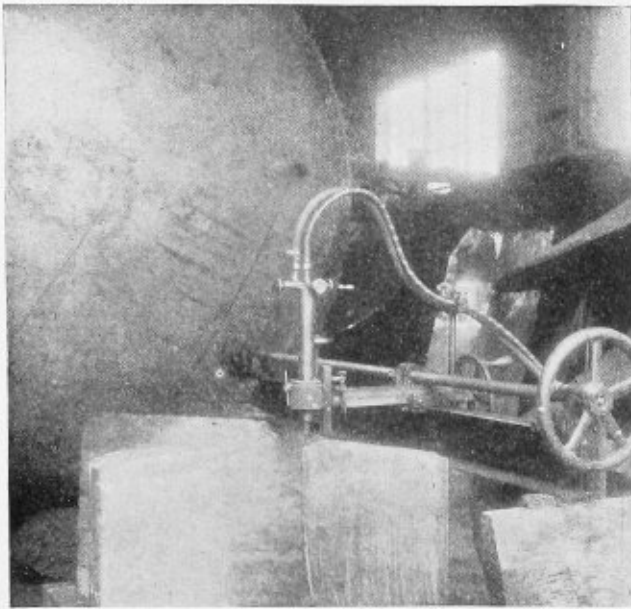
Oxy-Acetylene Cutting Device of Simple Construction, Which is Effective in Plate and Casting Work
